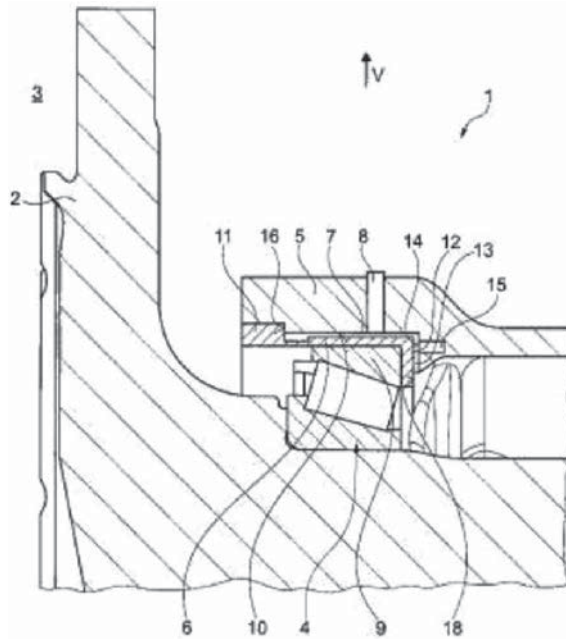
Load detection device for a wheel hub bearing. Adapted from [289].
